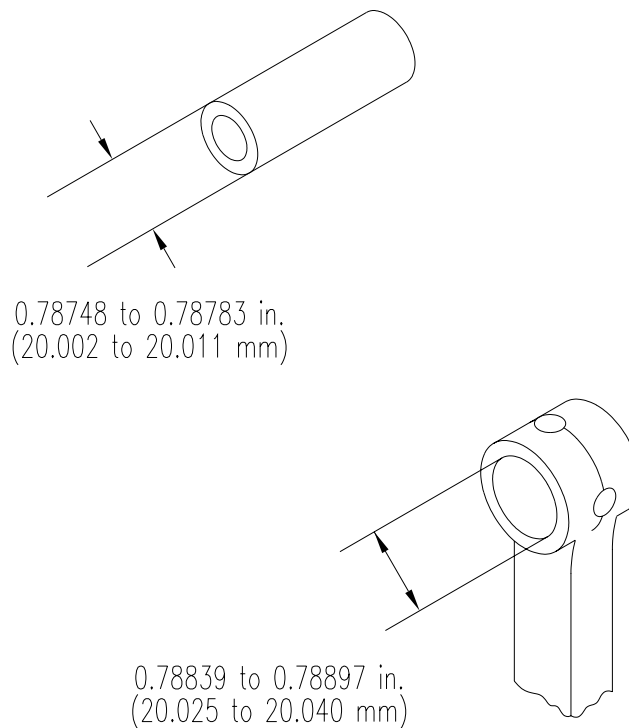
Connecting Rod (Sheet 1 of 4)
